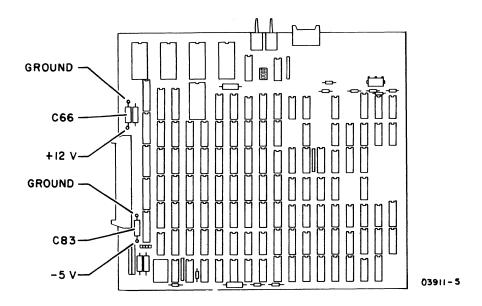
Test Points for -5 V and +12 V on Video Board
